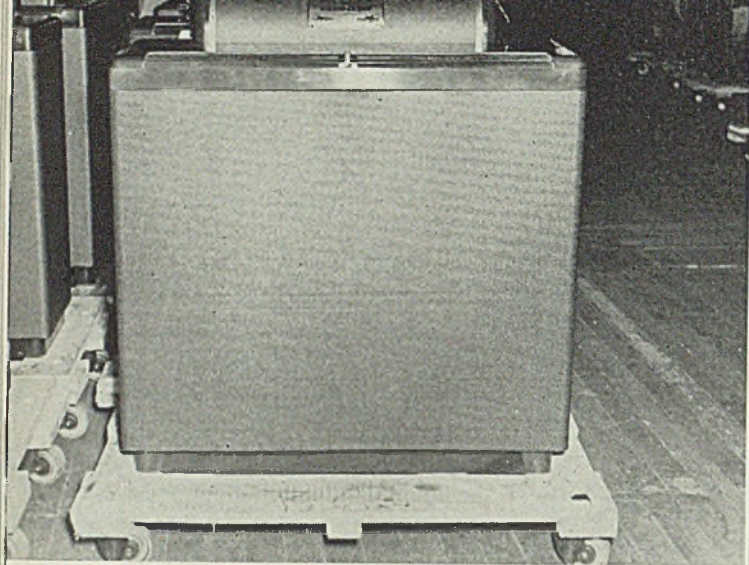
(Left)—This is the assembly line for the FB70 air-conditioning unit. Here are employed the removable casters that are placed in what becomes the crate bottom and on which the assembly is built up. The wheels of the casters ride in guides on the raised track, thus keeping them in line
